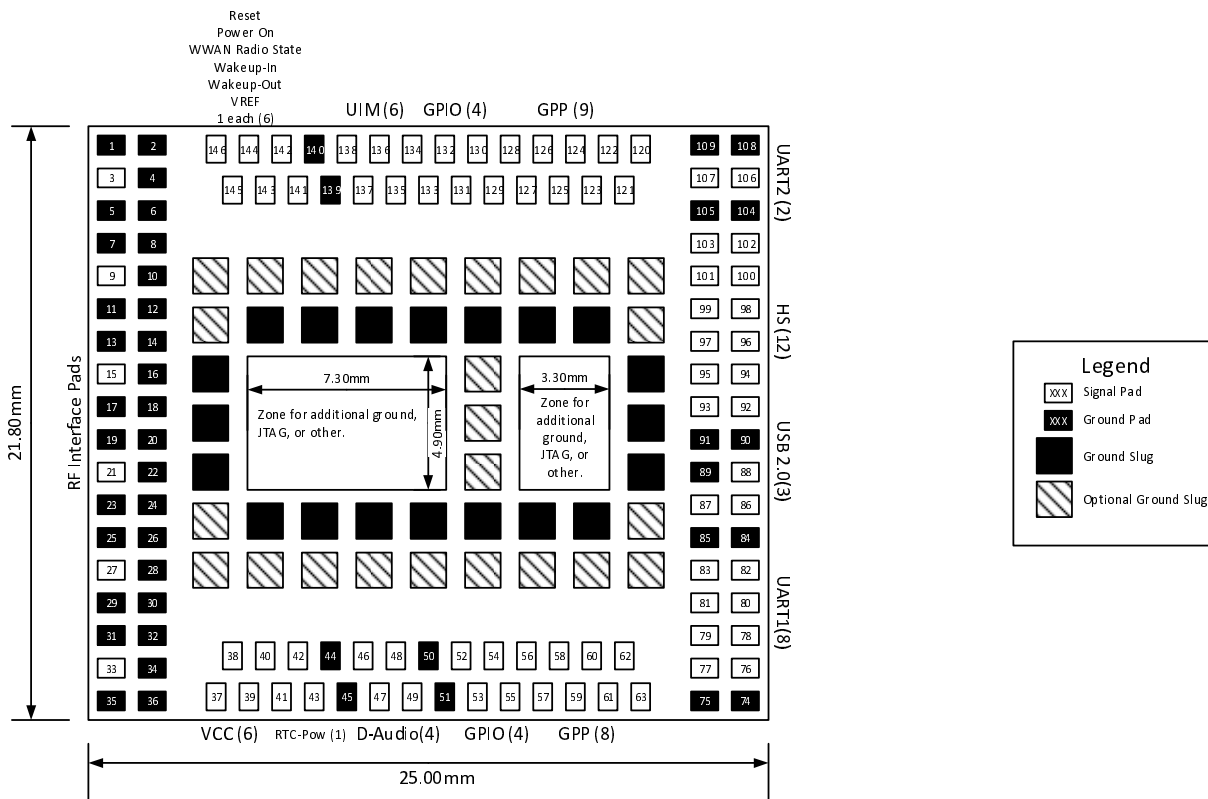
SMT2522 black and white physical form factor (545 mm<sup>2</sup>), dimensions, pad numbering and placement
